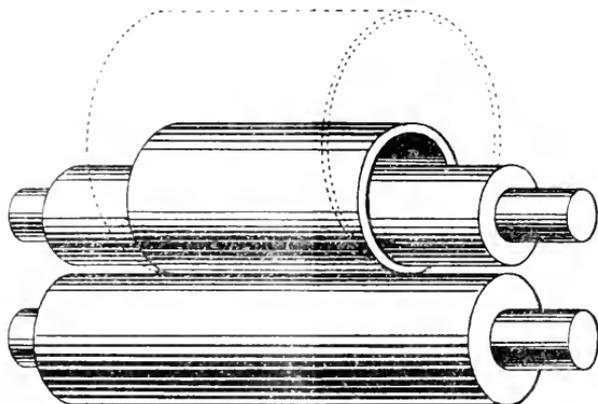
ROLLING OUT THE PERFORATED BLANK.
